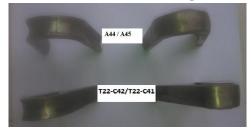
SA 213 T22 Specimens After Face & Root Bend Testing
